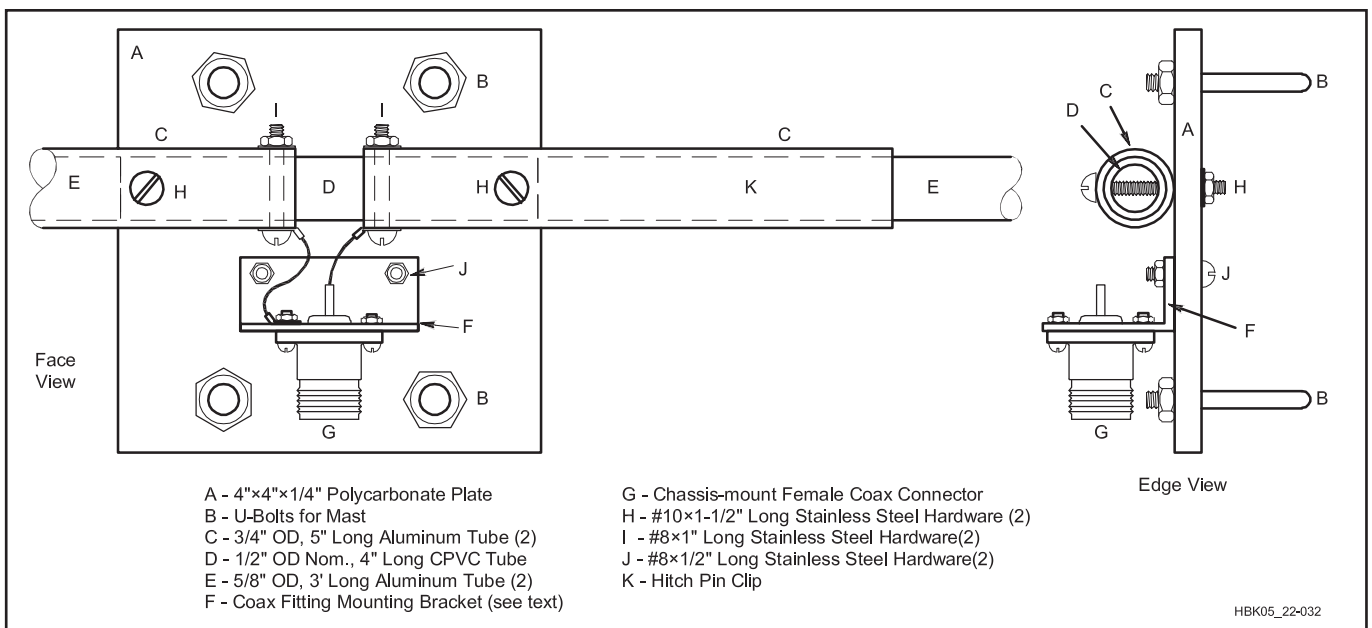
The element and feed point mounting plate, with details of the construction used in the prototype.
